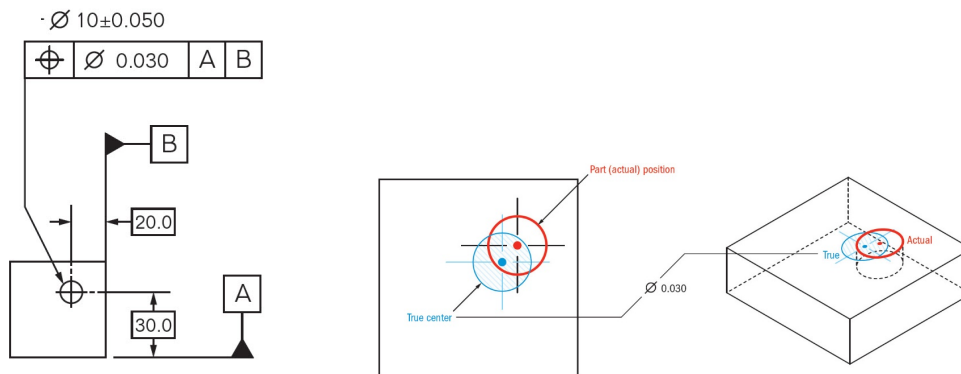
The position symbol. The top diameter callout defines the diameter and diameter tolerance for the hole. The boxed elements on the dimension leader are, from left to right, the position symbol, the hole axis position tolerance (the diameter of the circle defining the tolerable region), and the datums of the first and second reference edges. Note that the dimensions defining hole location are also boxed, as they are part of the position requirement.
